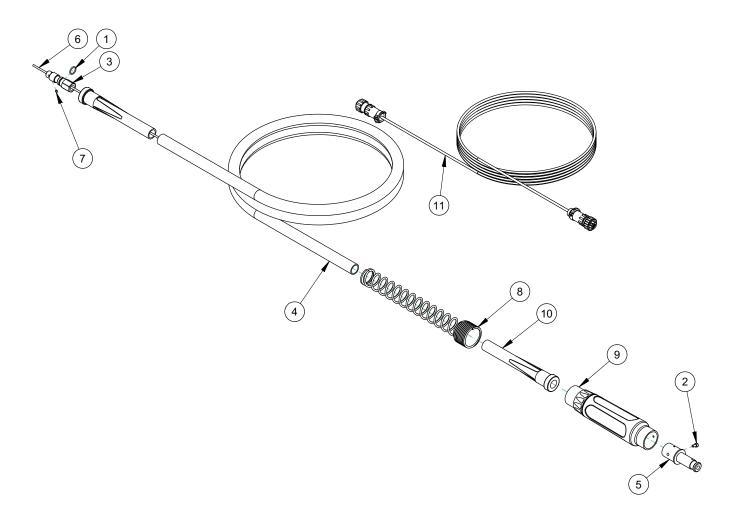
POWER SUPPLY FOR SWITCH MILLER ASSEMBLY (P/N 85475)
